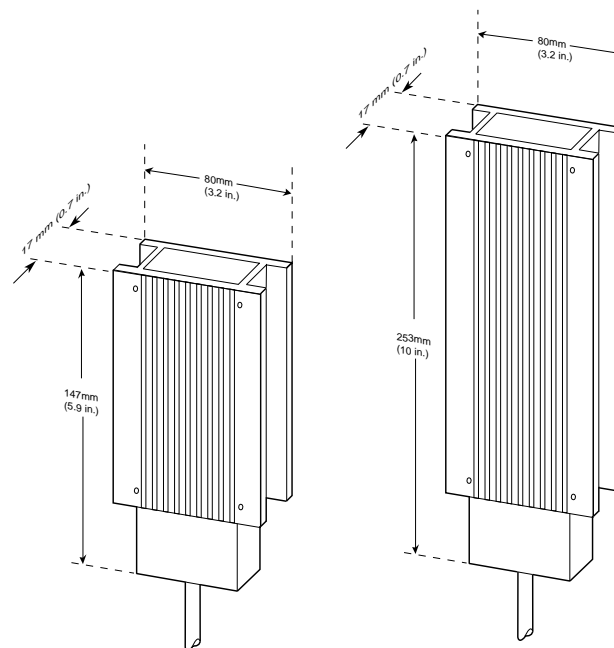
Size and mounting dimensions of the ballast resistor in the versions with 100 W and 200 W continuous power
